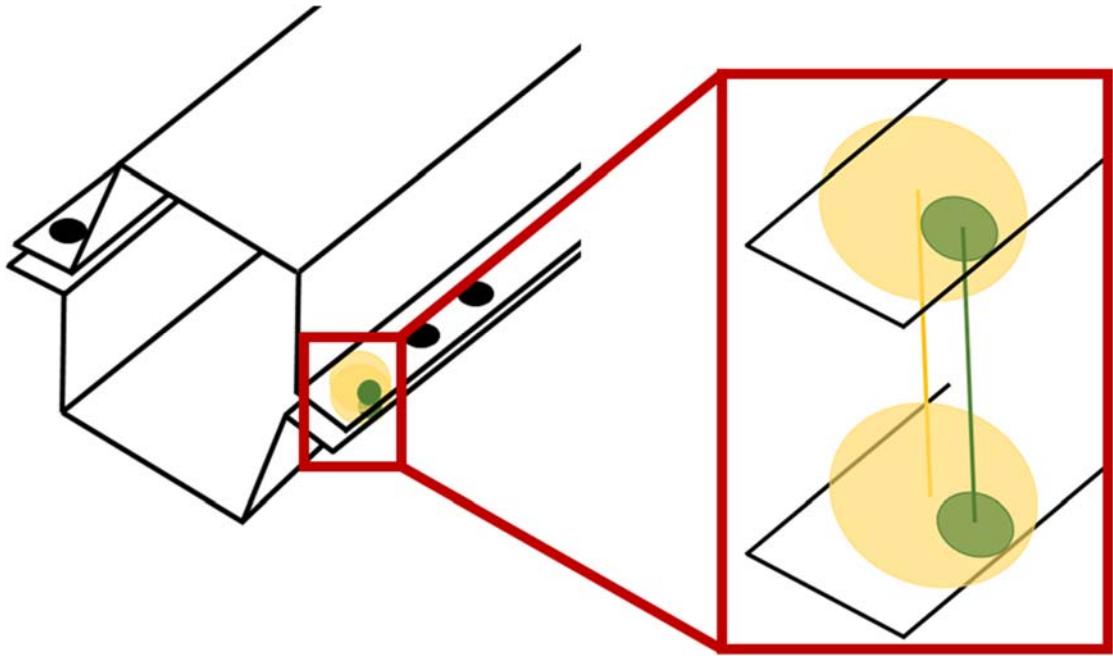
C.2: 3D schematic of double hat section showing detailed model of a single spot weld. Key: (green circle) spot weld/rigid connection; (yellow circle) damped connection.
